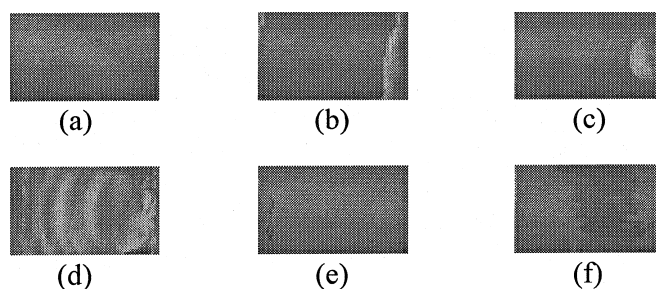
Fuel pellet images: (a) Good pellet; (b) Large end defect; (c) Chip; (d) Rippled surface; (e) Circumferential Crack; (f) Banded.
